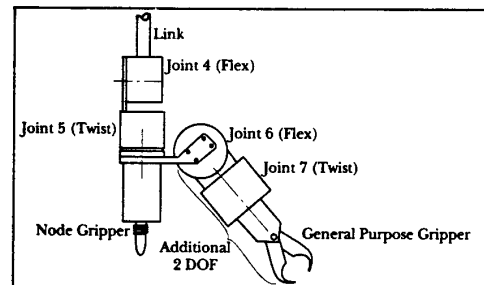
End-effector with two joints and general-purpose gripper will permit carrying and manipulation of parts.
